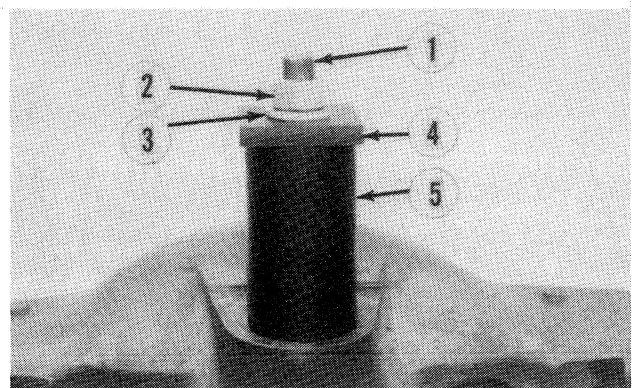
View showing removal equipment used to pull front pivot pin from front-wheel drive axle. Refer to text.
